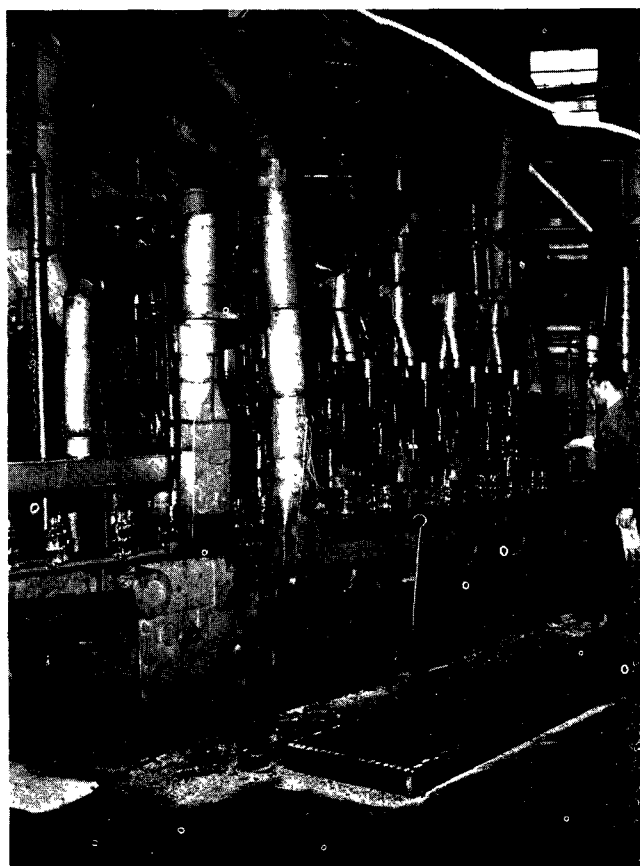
Hartford-Empire I.S. six-section glass-forming machine. (Thatcher Glass Co., Sangus, Calif.).
